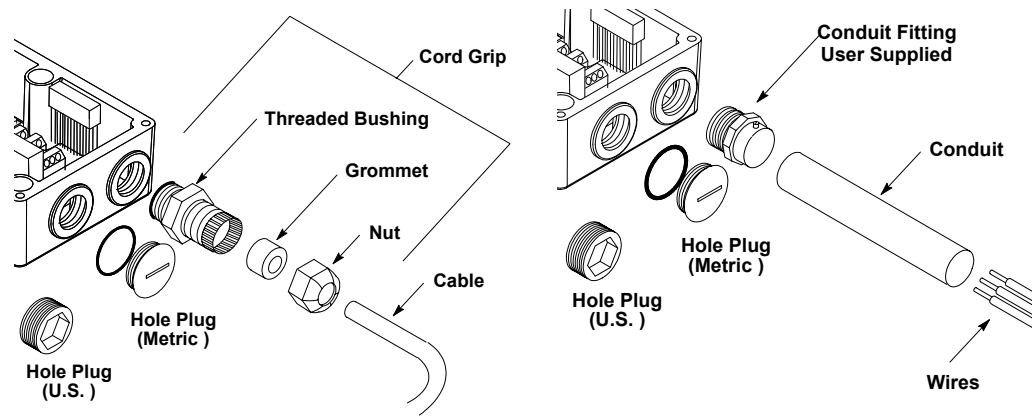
Cabling, Conduit, and Hole Plugs on Axiom Wiring Base
